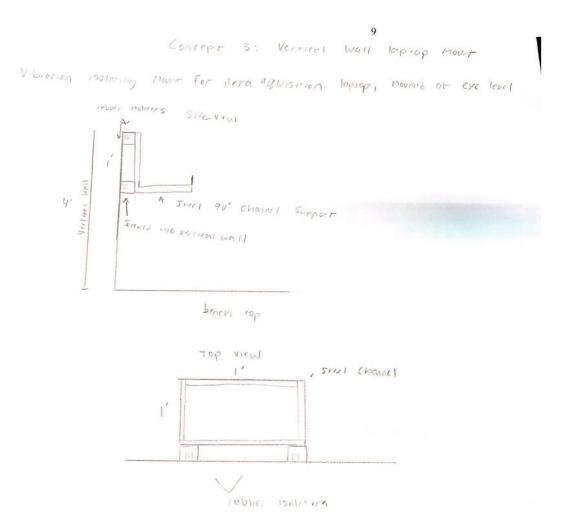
VERTICAL WALL LAPTOP MOUNT
